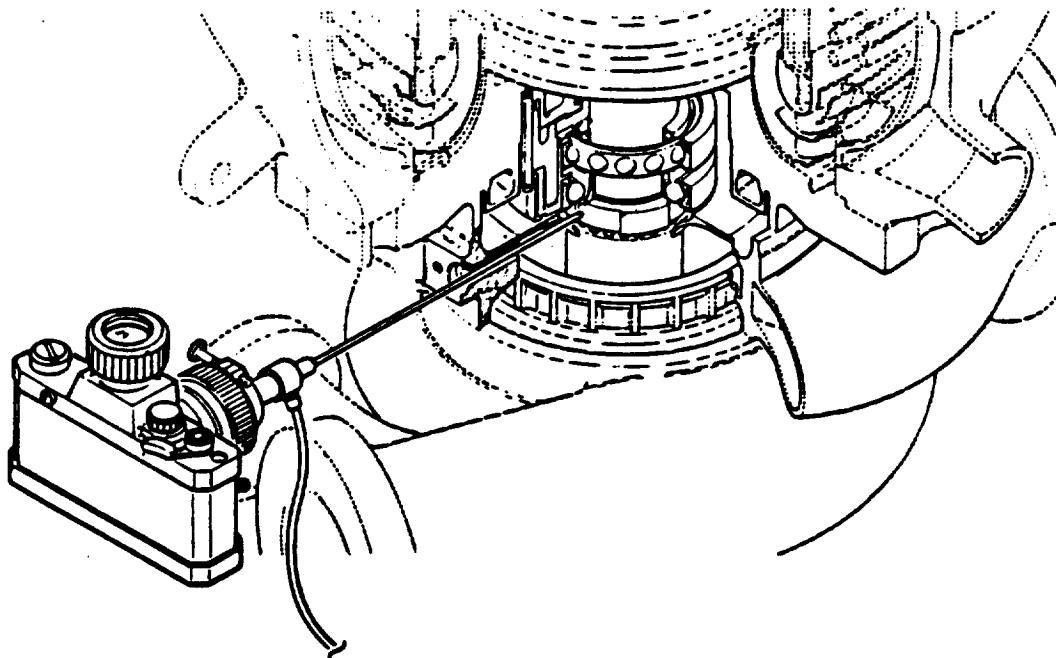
HPOTP No. 3 Bearing Photographic Condition Recording.
